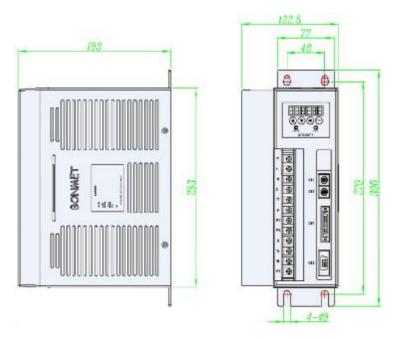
SA3L15C/SA3L25C dimension drawings
